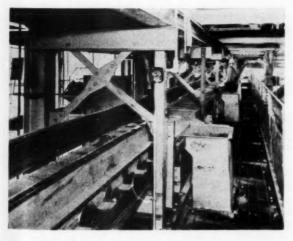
Apron conveyors handling castings to sand blast machines on lower floor.
